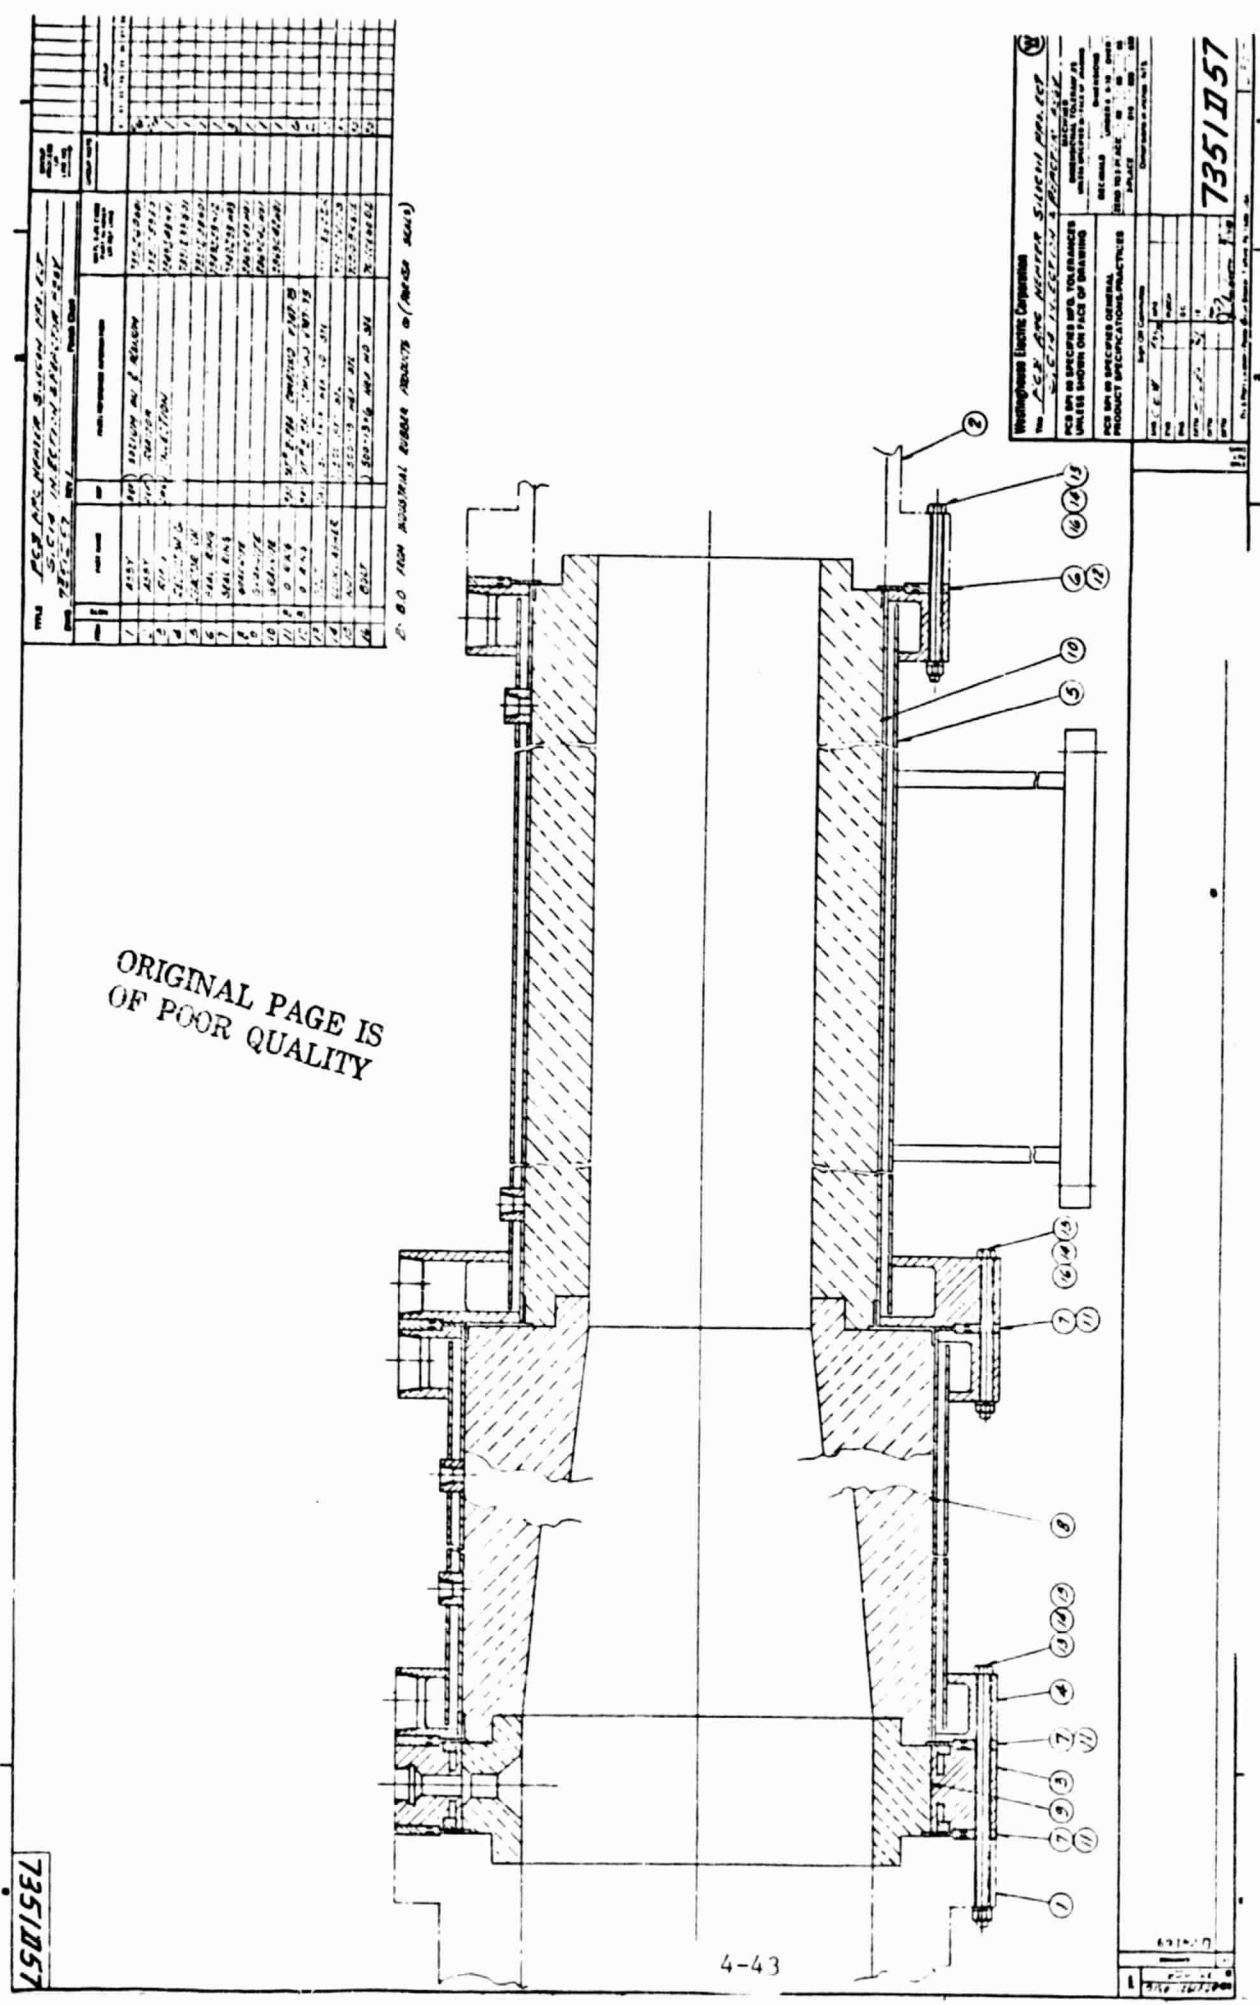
Assembly Drawing Of The SiCl₄ Injector Ring And Reactor Sections
